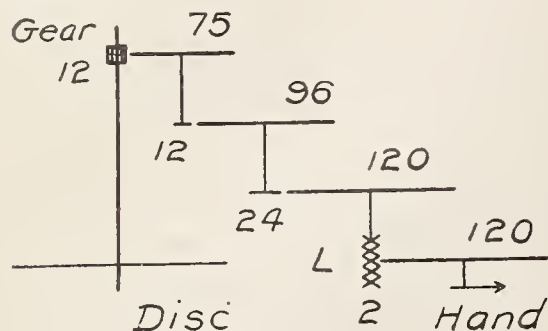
DIAL GEARING WITH PINION ON ARMATURE SHAFT
